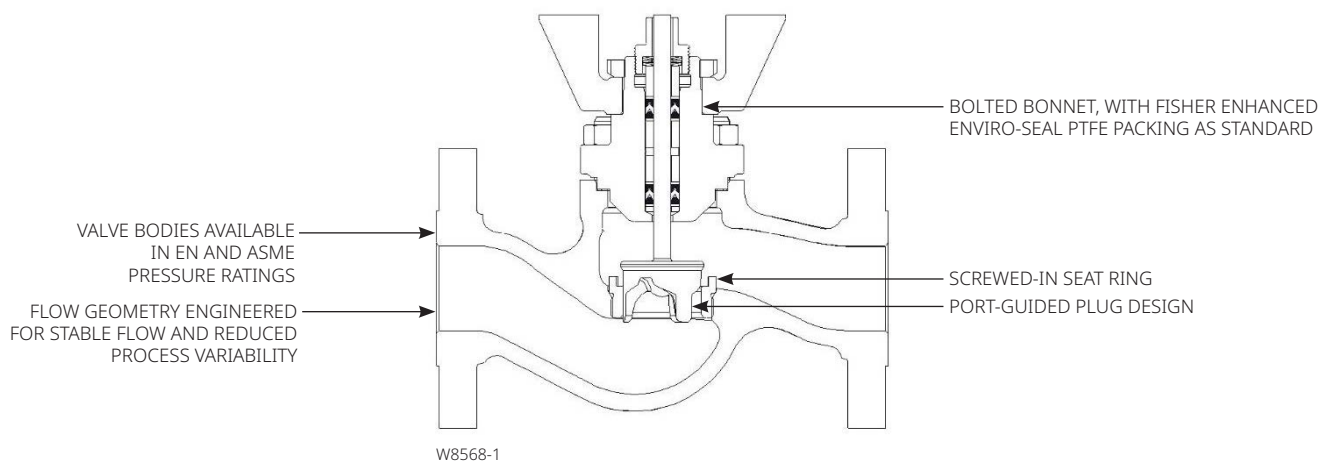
Fisher GX Bolted Bonnet Control Valve with Balanced Trim (DN 80 to 150 and NPS 3 to 6, Port Sizes of 70, 90 and 136 mm Only)
